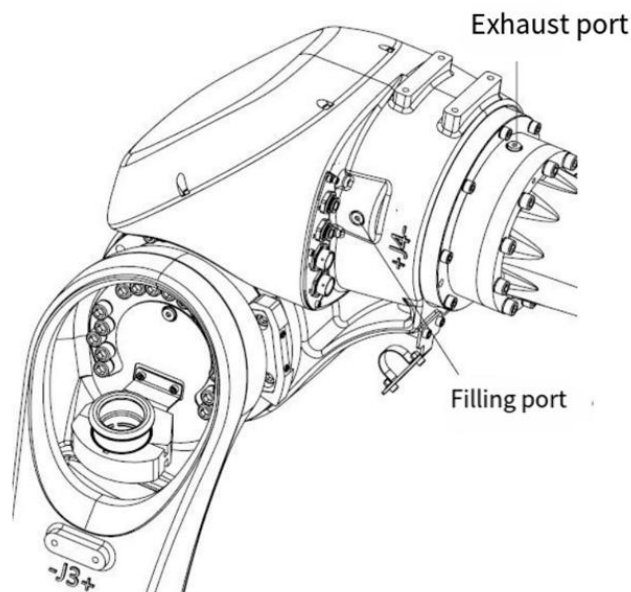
Lubricant Replacement for J4 Shaft Reducer
